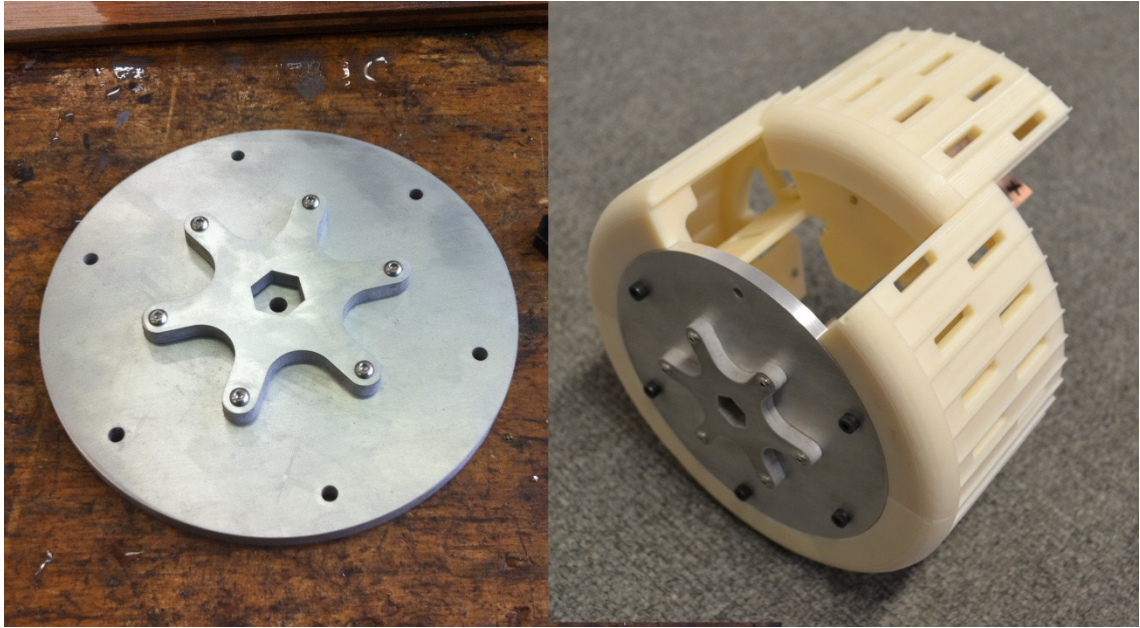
Wheel Disc used for holding together the wheel structure. An aluminium disc is used to mount the assembled wheel to the chassis as well as giving strength to the wheel structure.
